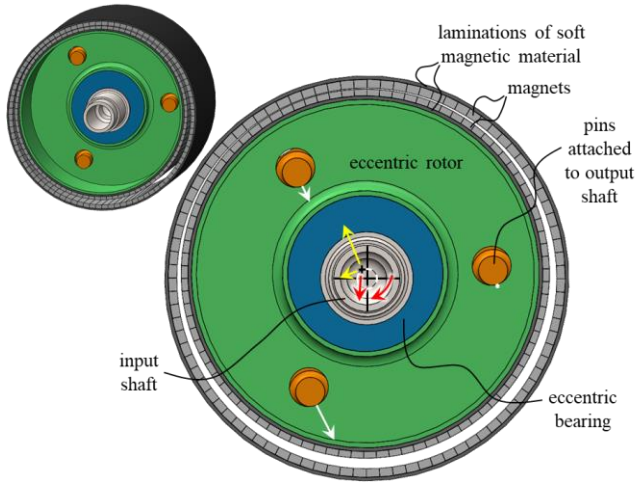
Example cycloidal magnetic gear (housing hidden) with sliding pin contact showing the loads on the eccentric rotor: net radial magnetic force and torque (red arrows), contact force between pins and eccentric rotor (white arrows), and load through eccentric bearing (yellow arrows); eccentric rotor's center (small black cross) orbits the gear's main axis (large black cross) around the dashed white circle of radius equal to the eccentricity.
